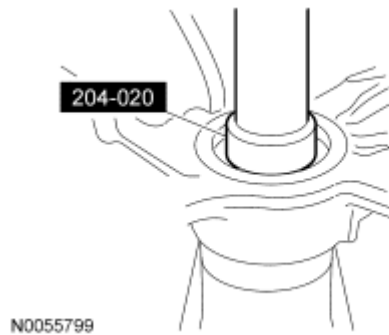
Pressing Outer Wheel Bearing Race From Wheel Knuckle Using Special Tool (204-020)
